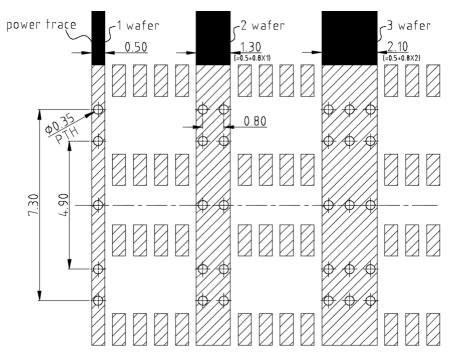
PCB LAYOUT FOR MOTHER BOARD WITH POWER (YOUR CONFIGURATION MAY VARY)
